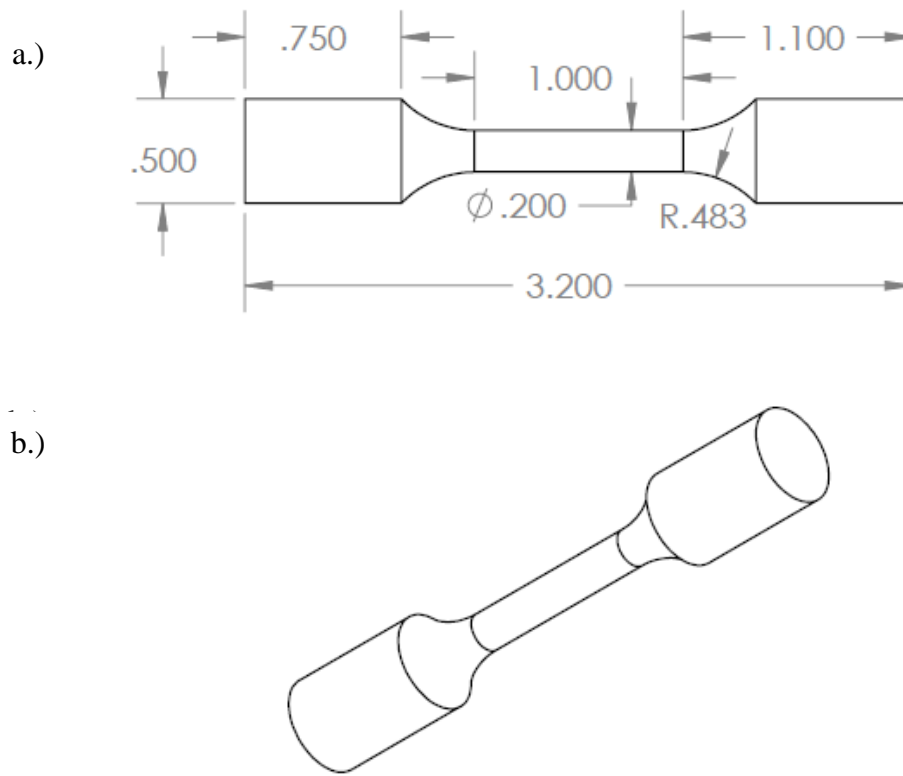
a.) Geometric dimensions of reduced test specimen in inches, b.) 3D image of reduced test specimen
